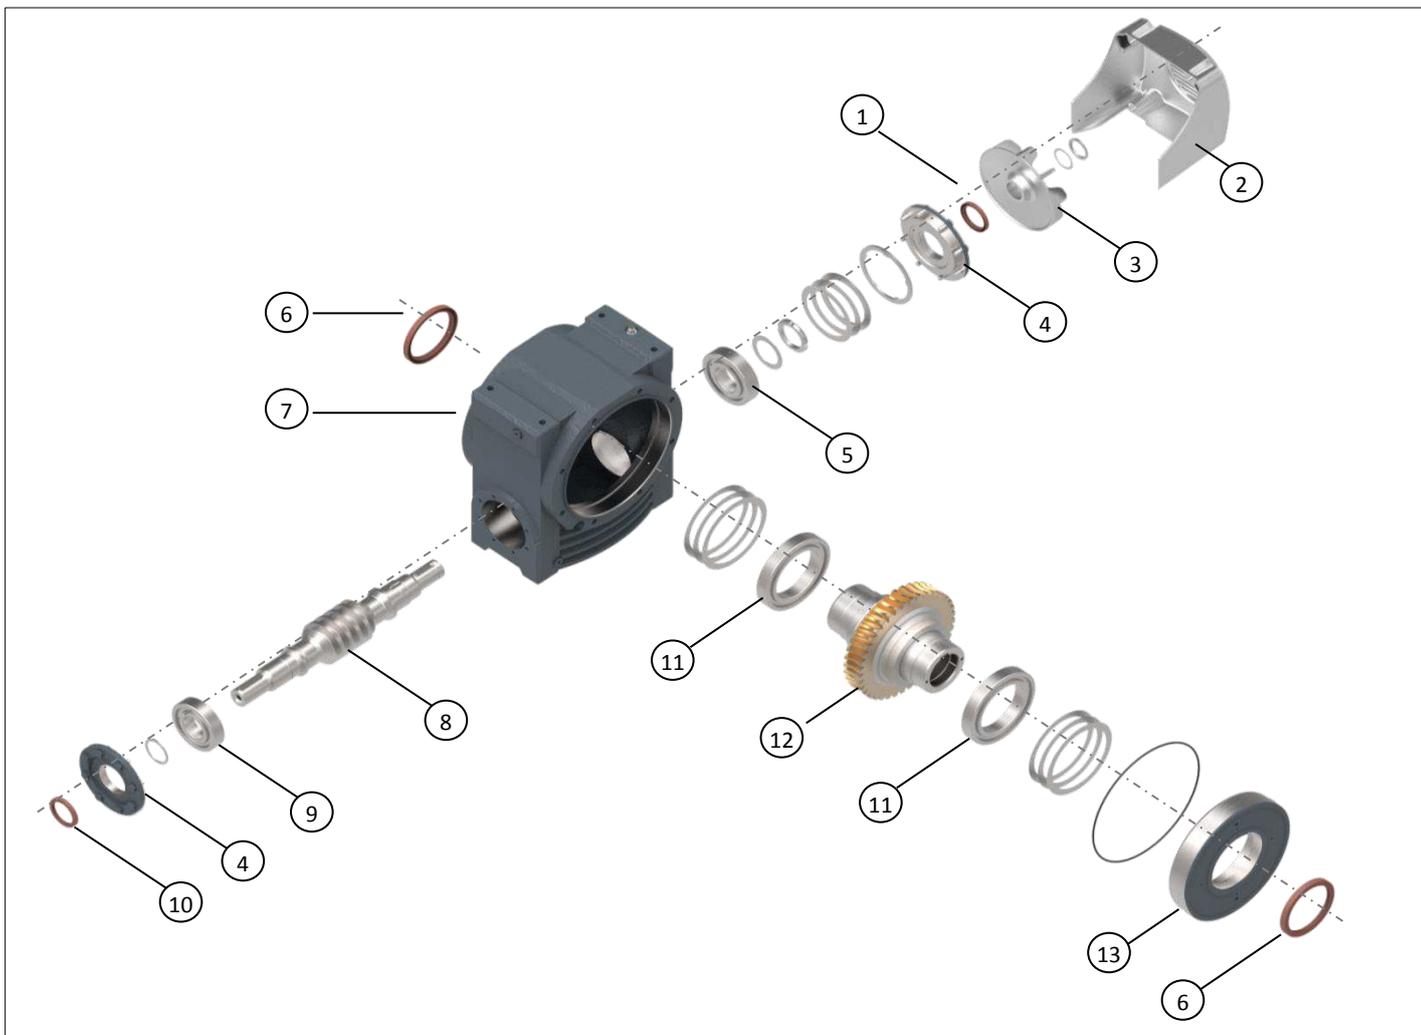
Exploded view of sizes S100.1 – S160.1
